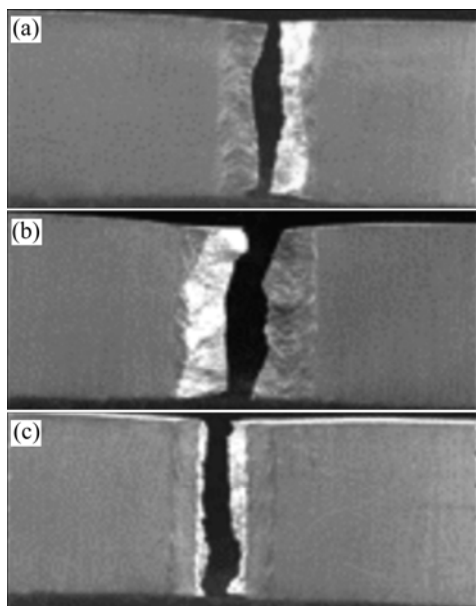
Fracture location of tensile specimens: (a) Dissymmetrical “X” cross-section; (b) Symmetrical “X” cross-section; (c) Consistent “H” cross-section
